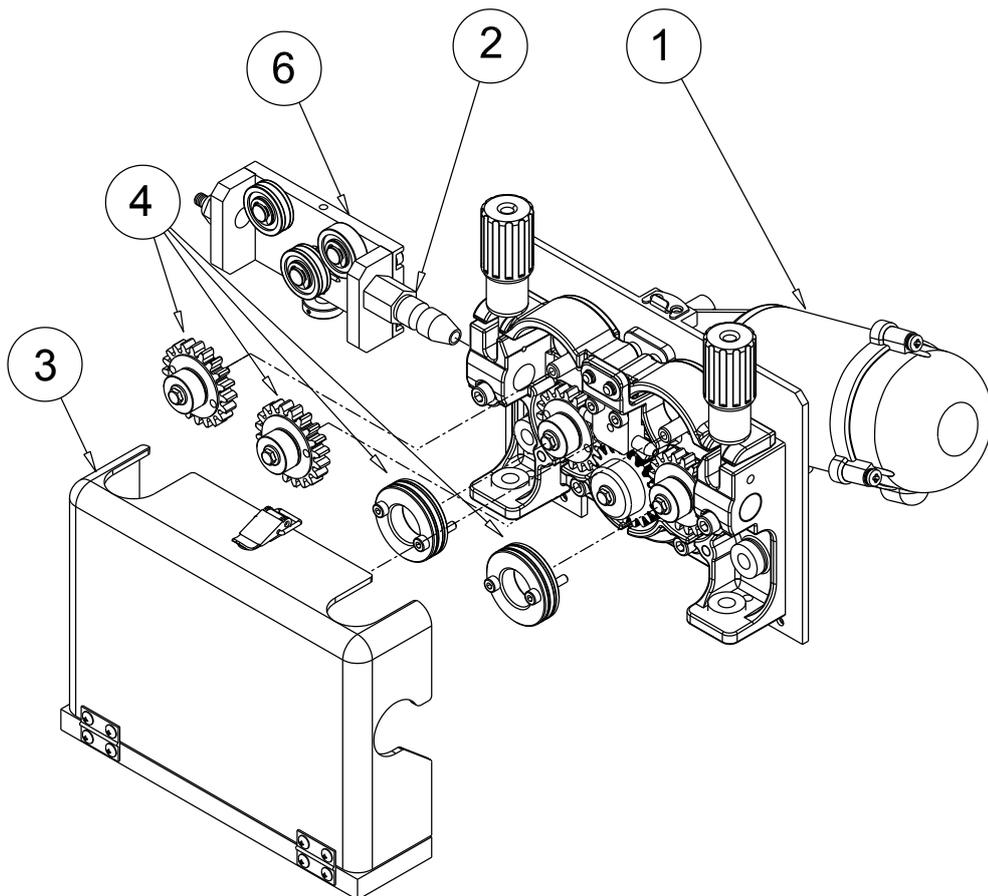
Exploded diagram of wire feeding unit (AFA-4012)
